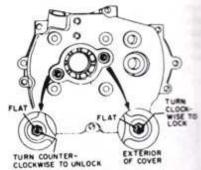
View showing bearing locks on Models HM70, HH70, HM80 and HM100 equipped with ball bearing main. Locks must be released before removing crankcase core. Refer to Fig. T37 for interior view of cover and locks.
